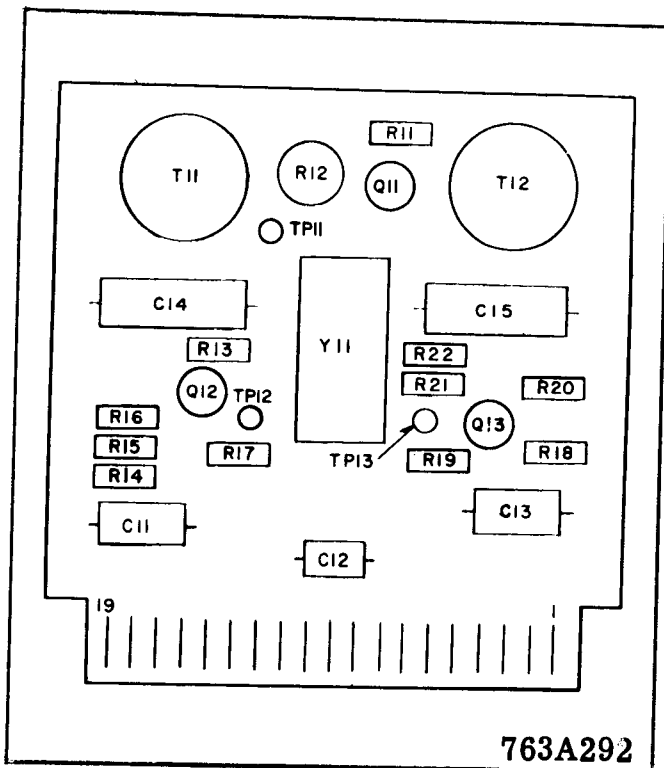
Component Locations on Oscillator and Mixer Printed Circuit Board.
